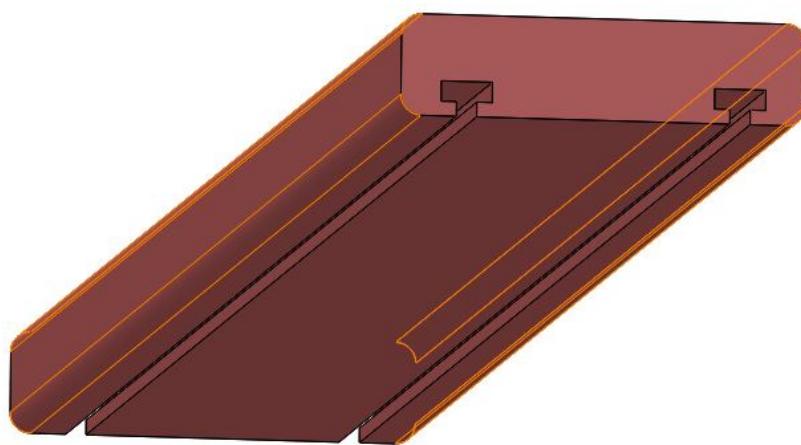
Ferrarer, Auston: Slide Bar
